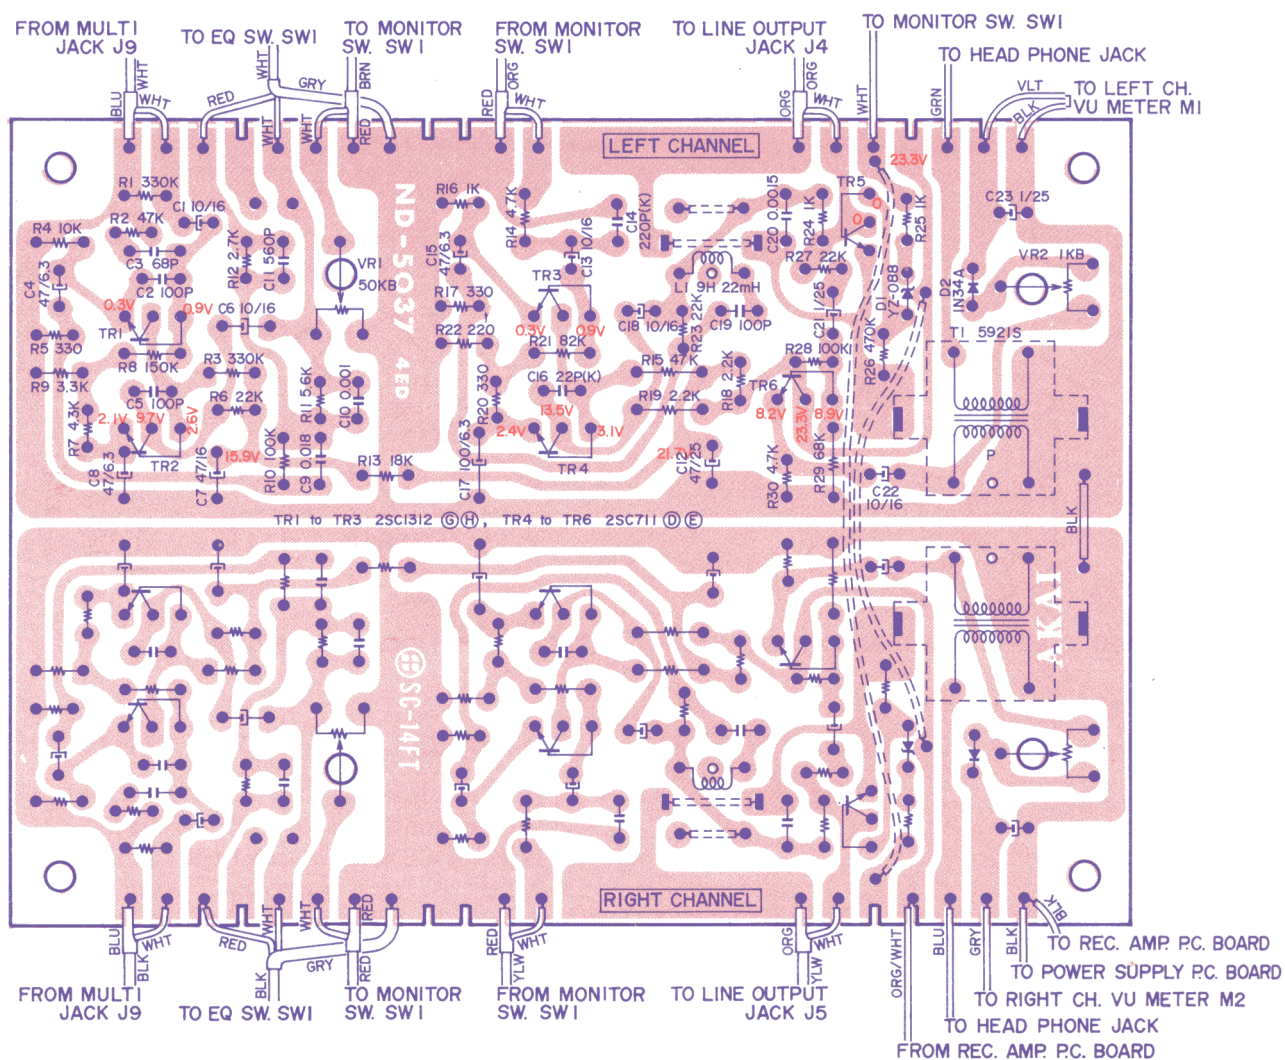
PLAYBACK AMP. P.C. BOARD ND-5037 (Reverse Side)
